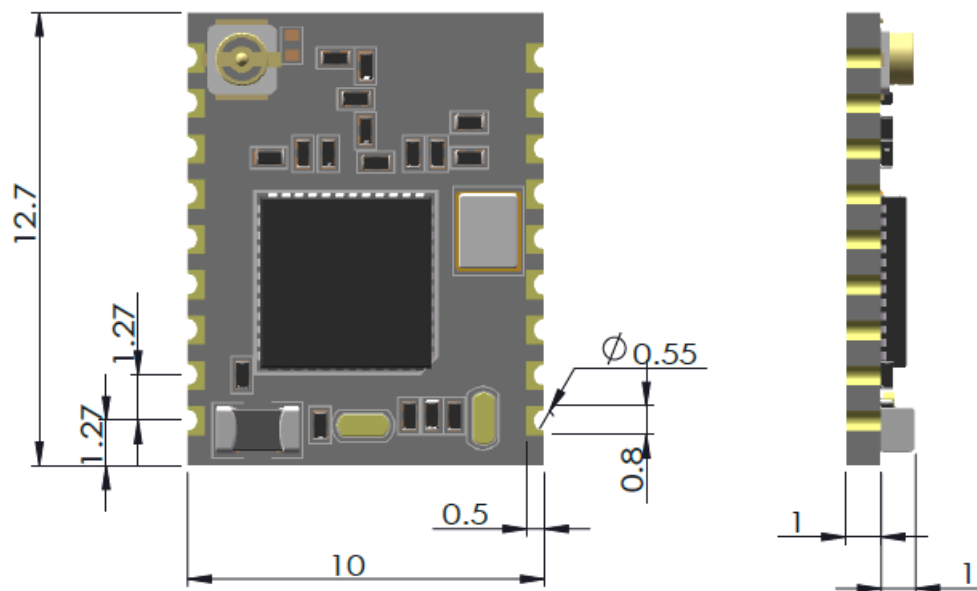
Module dimensions of HM-MT2401C without shield cover
